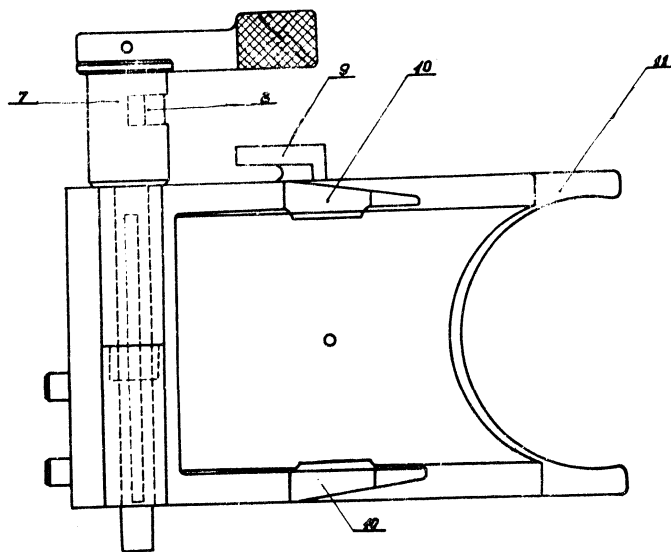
BREECHBLOCK ASSEMBLY (WITHOUT THE FRONT PLATE)
